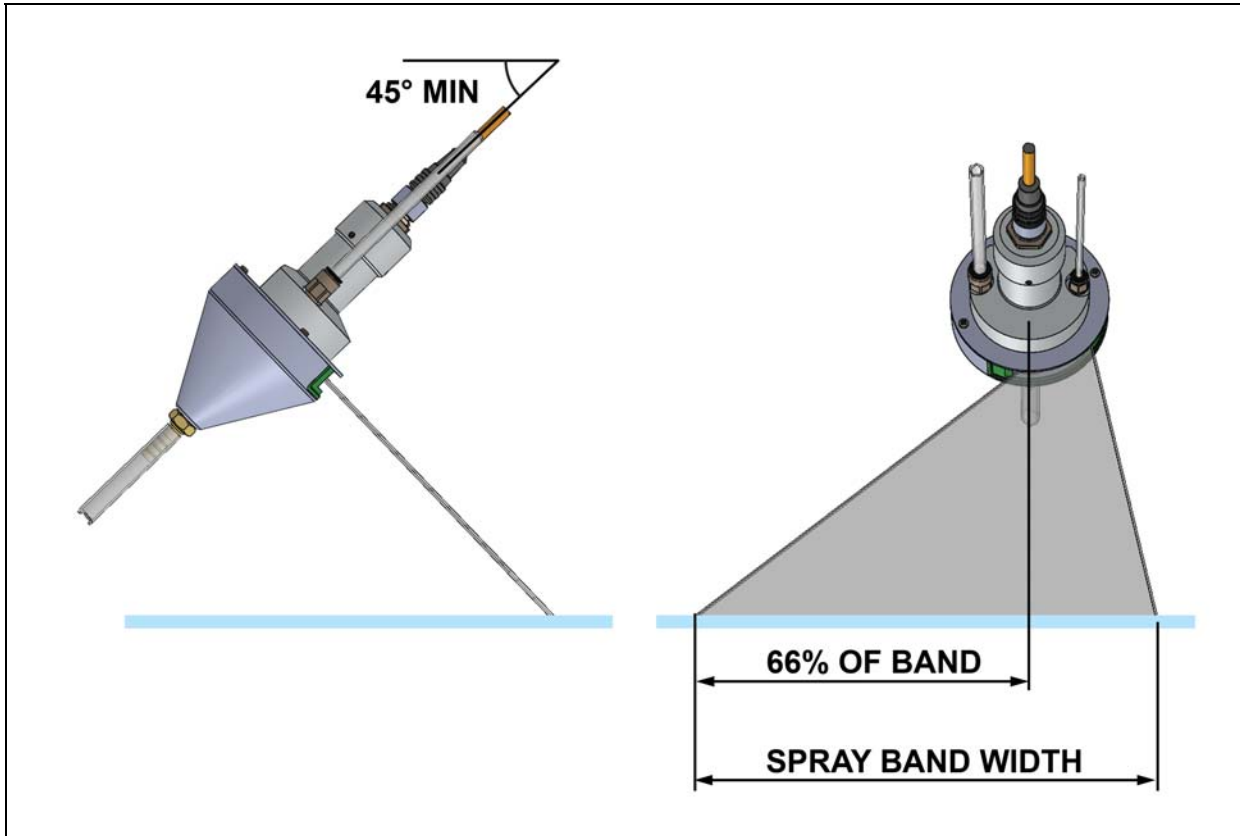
Mounting of Atomiser with Segmental Attachment
